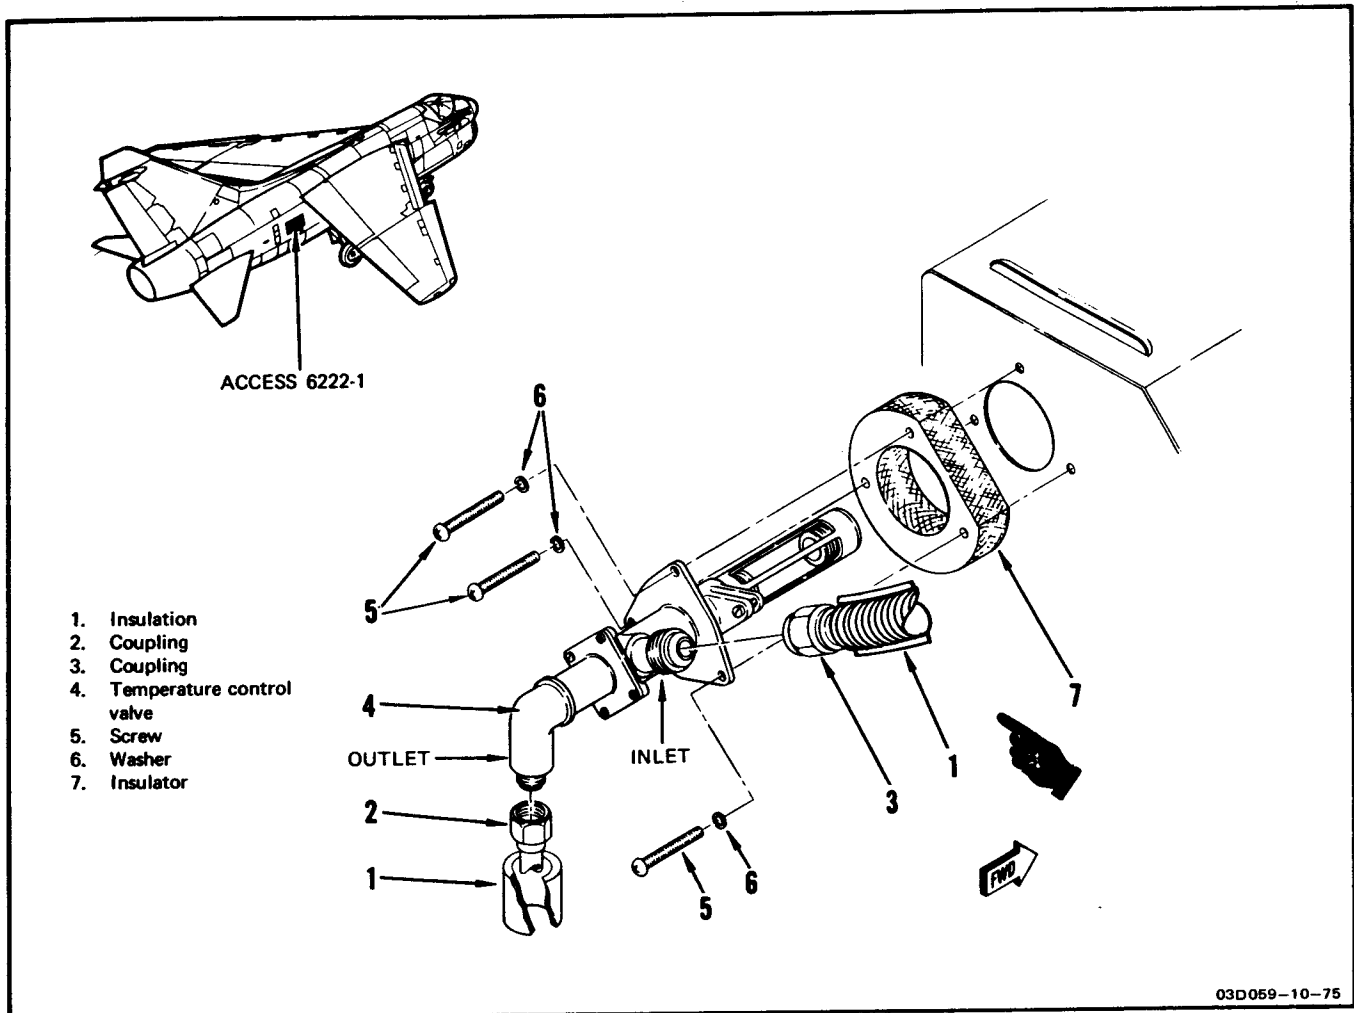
Camera Compartment Temperature Control Valve Removal and Installation
